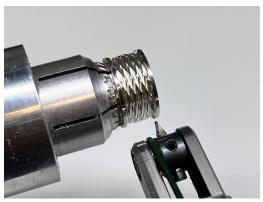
Cutting the spiral pattern with a rosette engaged on the Rose Engine
